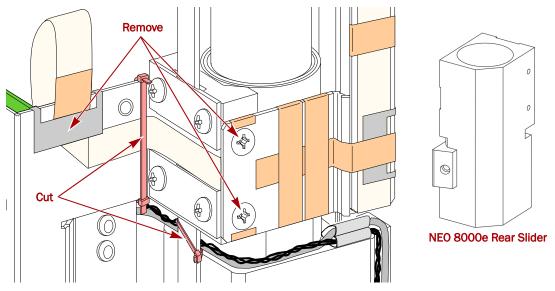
Clip, Cable Ties, and Screws to be Removed
